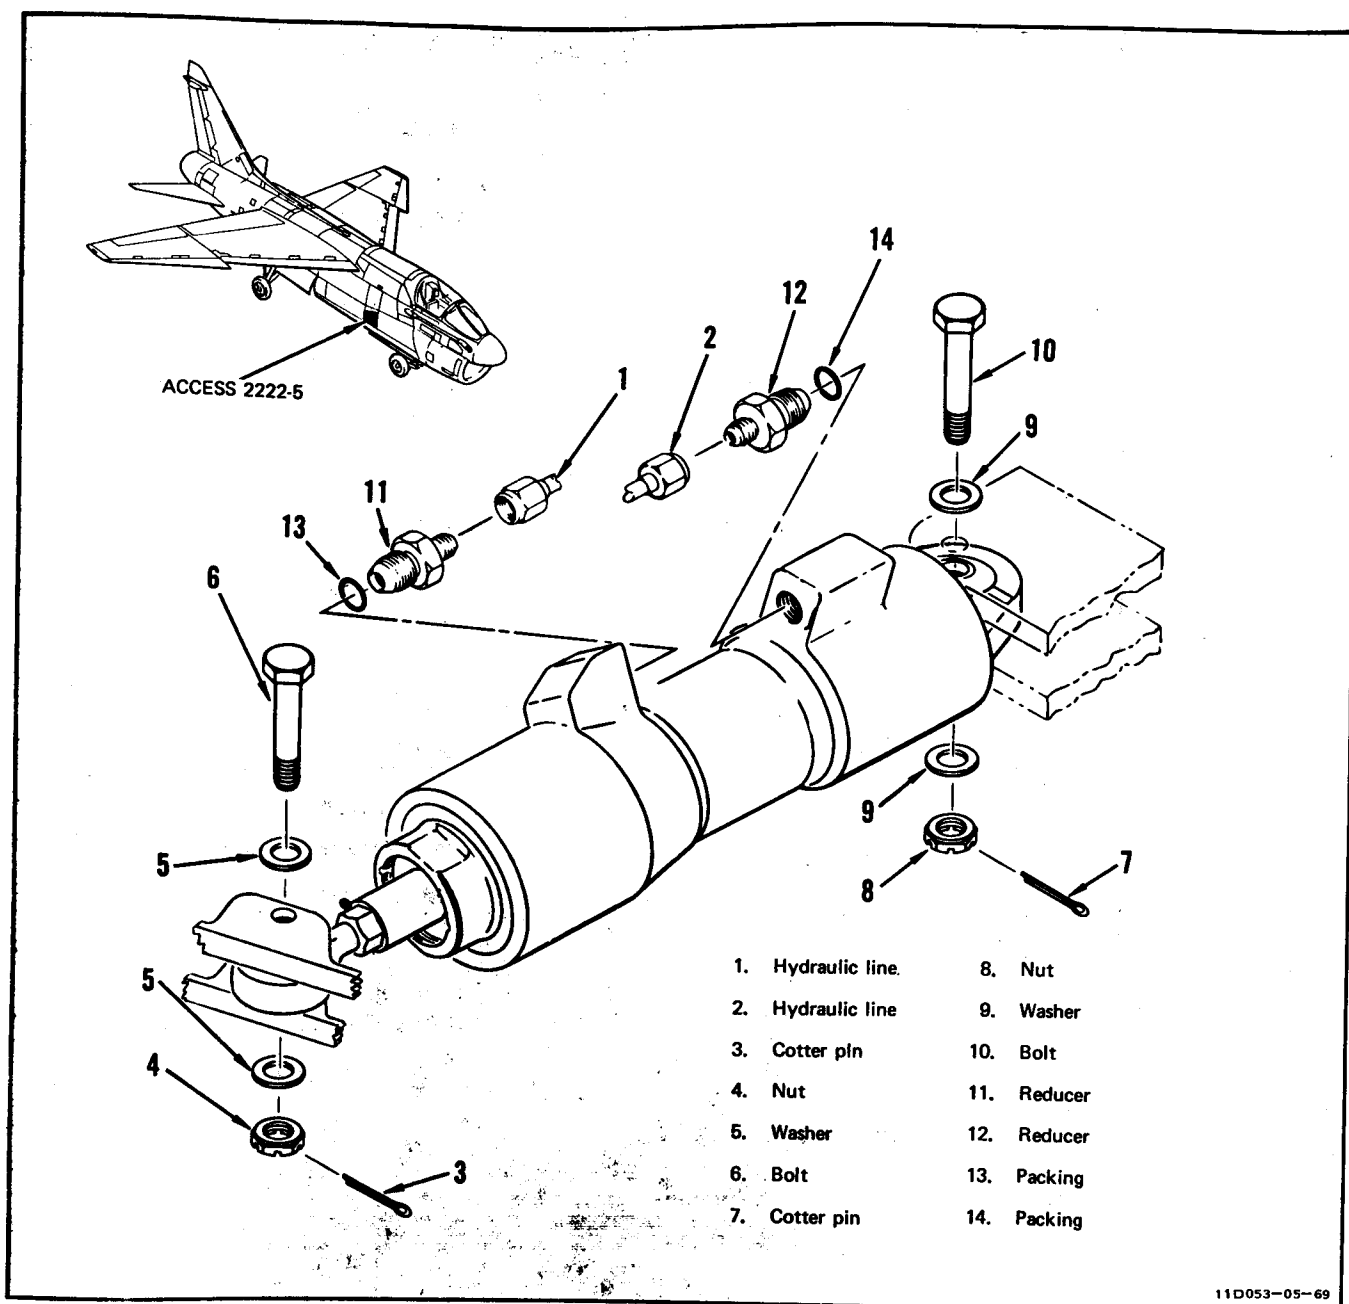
Emergency Power Package Actuating Cylinder Removal and Installation
